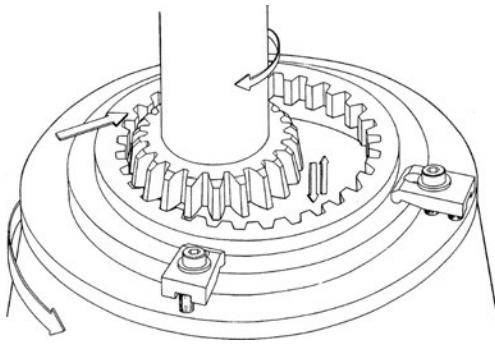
How a shaper-cutter cuts an internal gear. (Courtesy of Fellows Corp., Emhart Machinery Group, Springfield, Vermont.)
